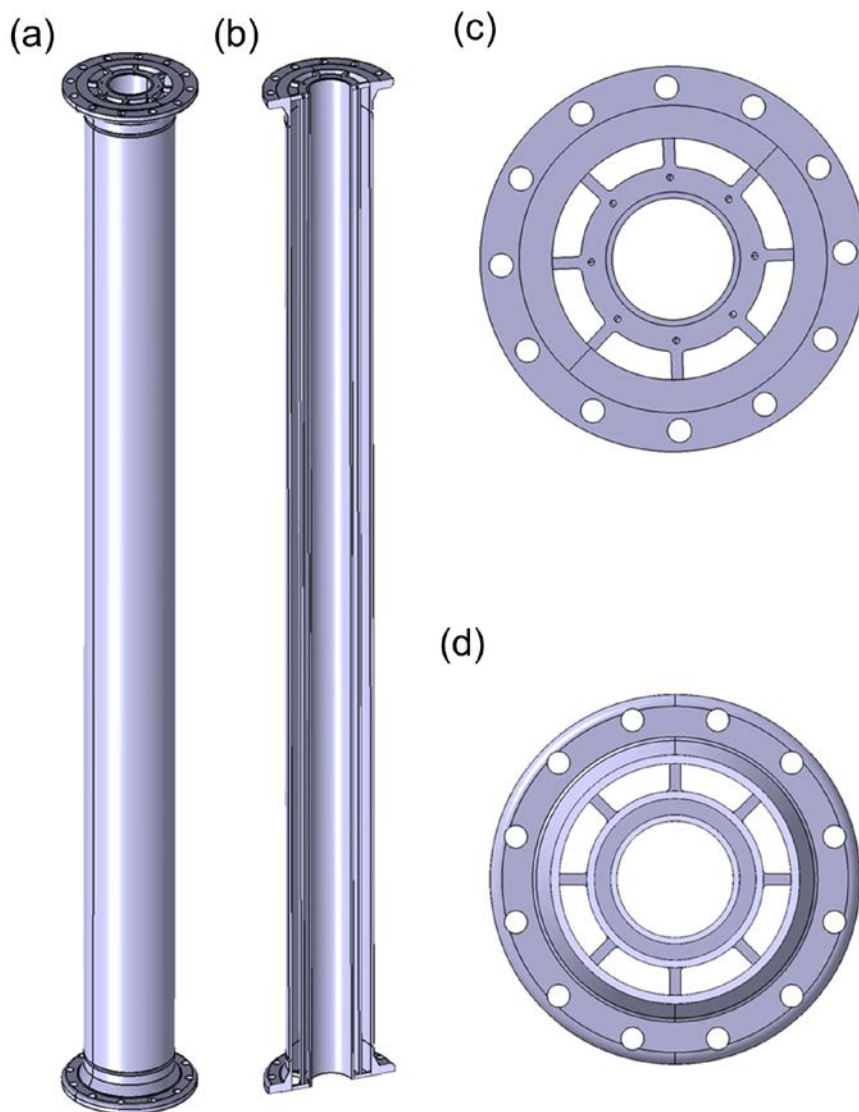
Three-dimensional model of PILLAR lower vessel and lower barrel assembly in several viewpoints. (a) Isomeric view, (b) cross-sectional view in z-direction, (c) top view, and (d) cross-sectional view in radial direction
